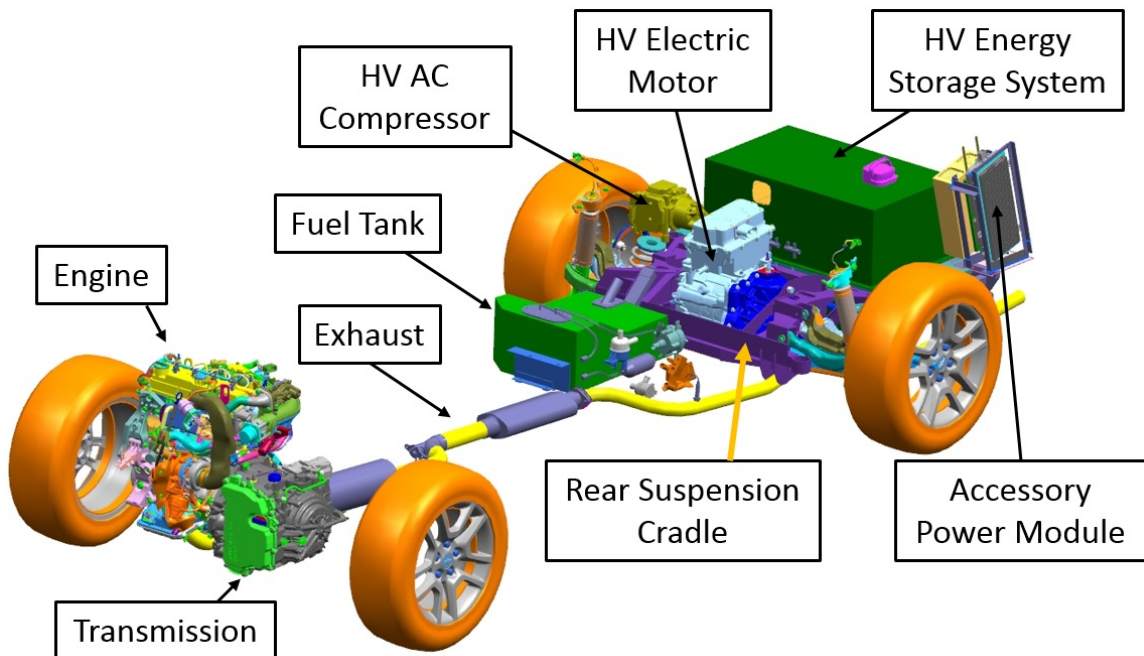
Parallel-Through-The-Road subsystem Packaging Assembly.
